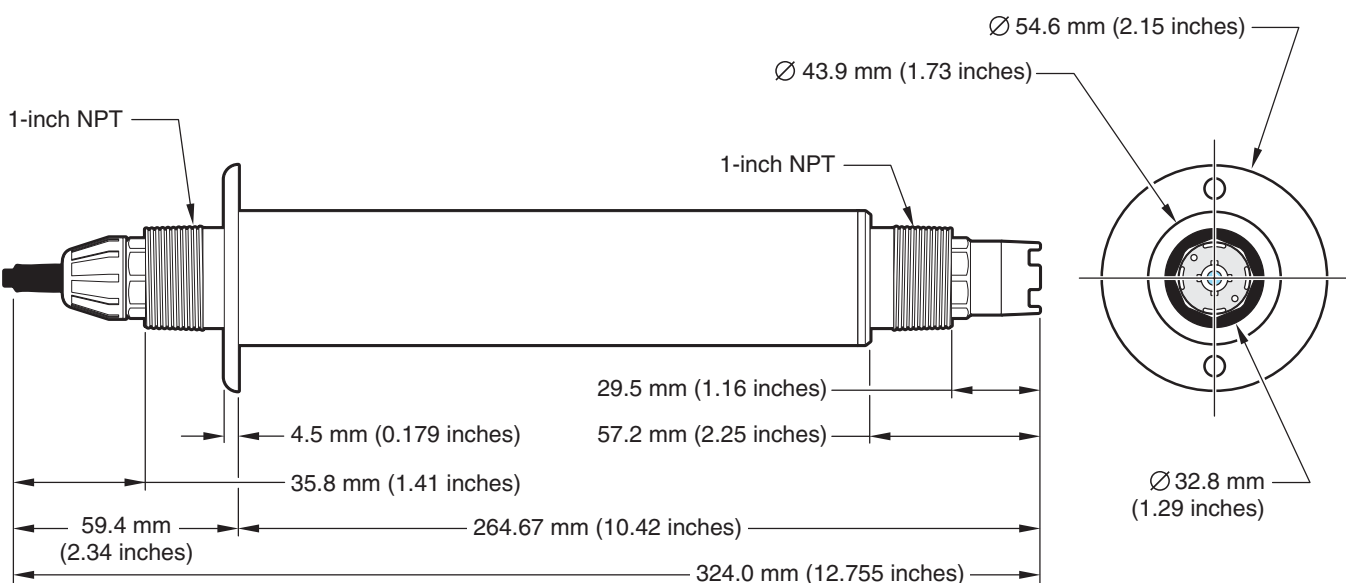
Stainless Steel Style Sensor (DPS1 and DRS5) Dimensions
